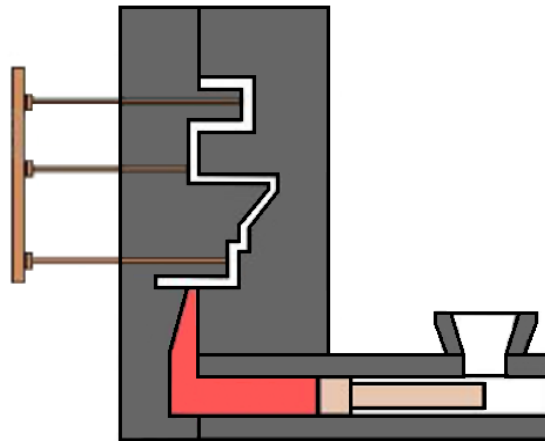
Mould filling test without vacuum, changeover point 500 mm
